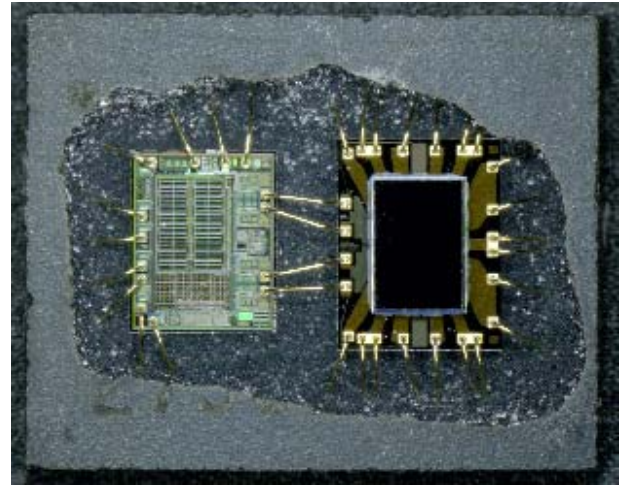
ADGM1304 LFCSP Package with Molding Compound Partially Removed to Show MEMS Switch Die (Right), Controller Die (Left), and Associated Wire Bonds
